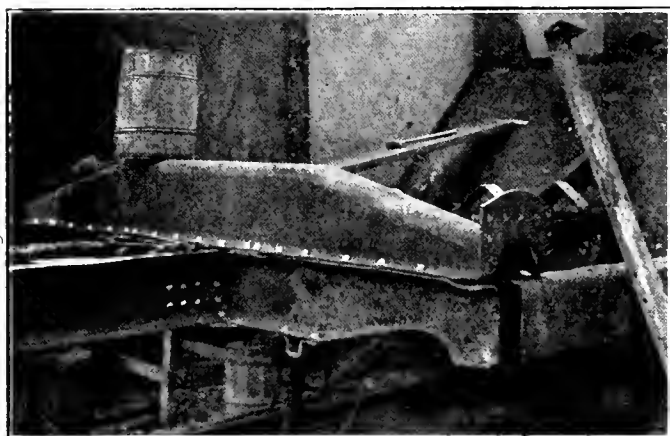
HOPPER CAR SIDE SILL BROKEN AT THE BOLSTER.
